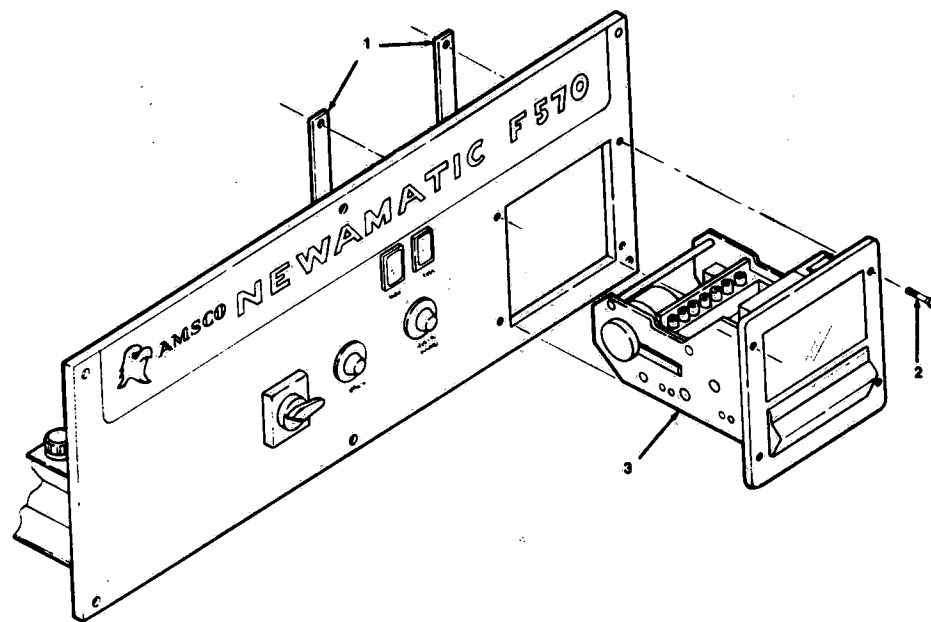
PUNCH-CARD CONTROL PANEL (Sheet 1 of 2).
